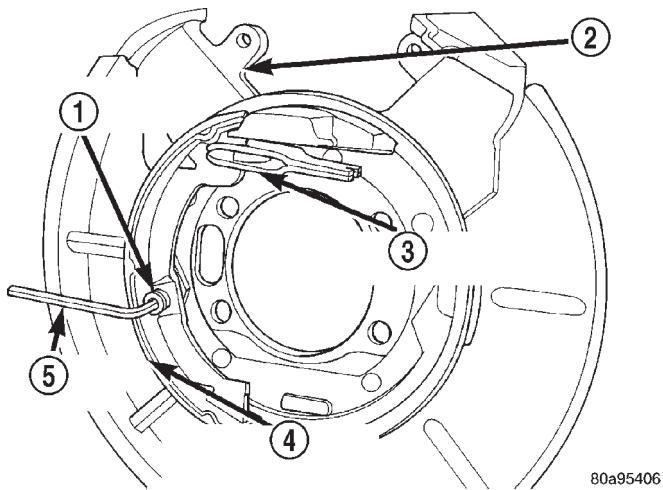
Trailing Brake Shoe Hold Down Pin And Spring
